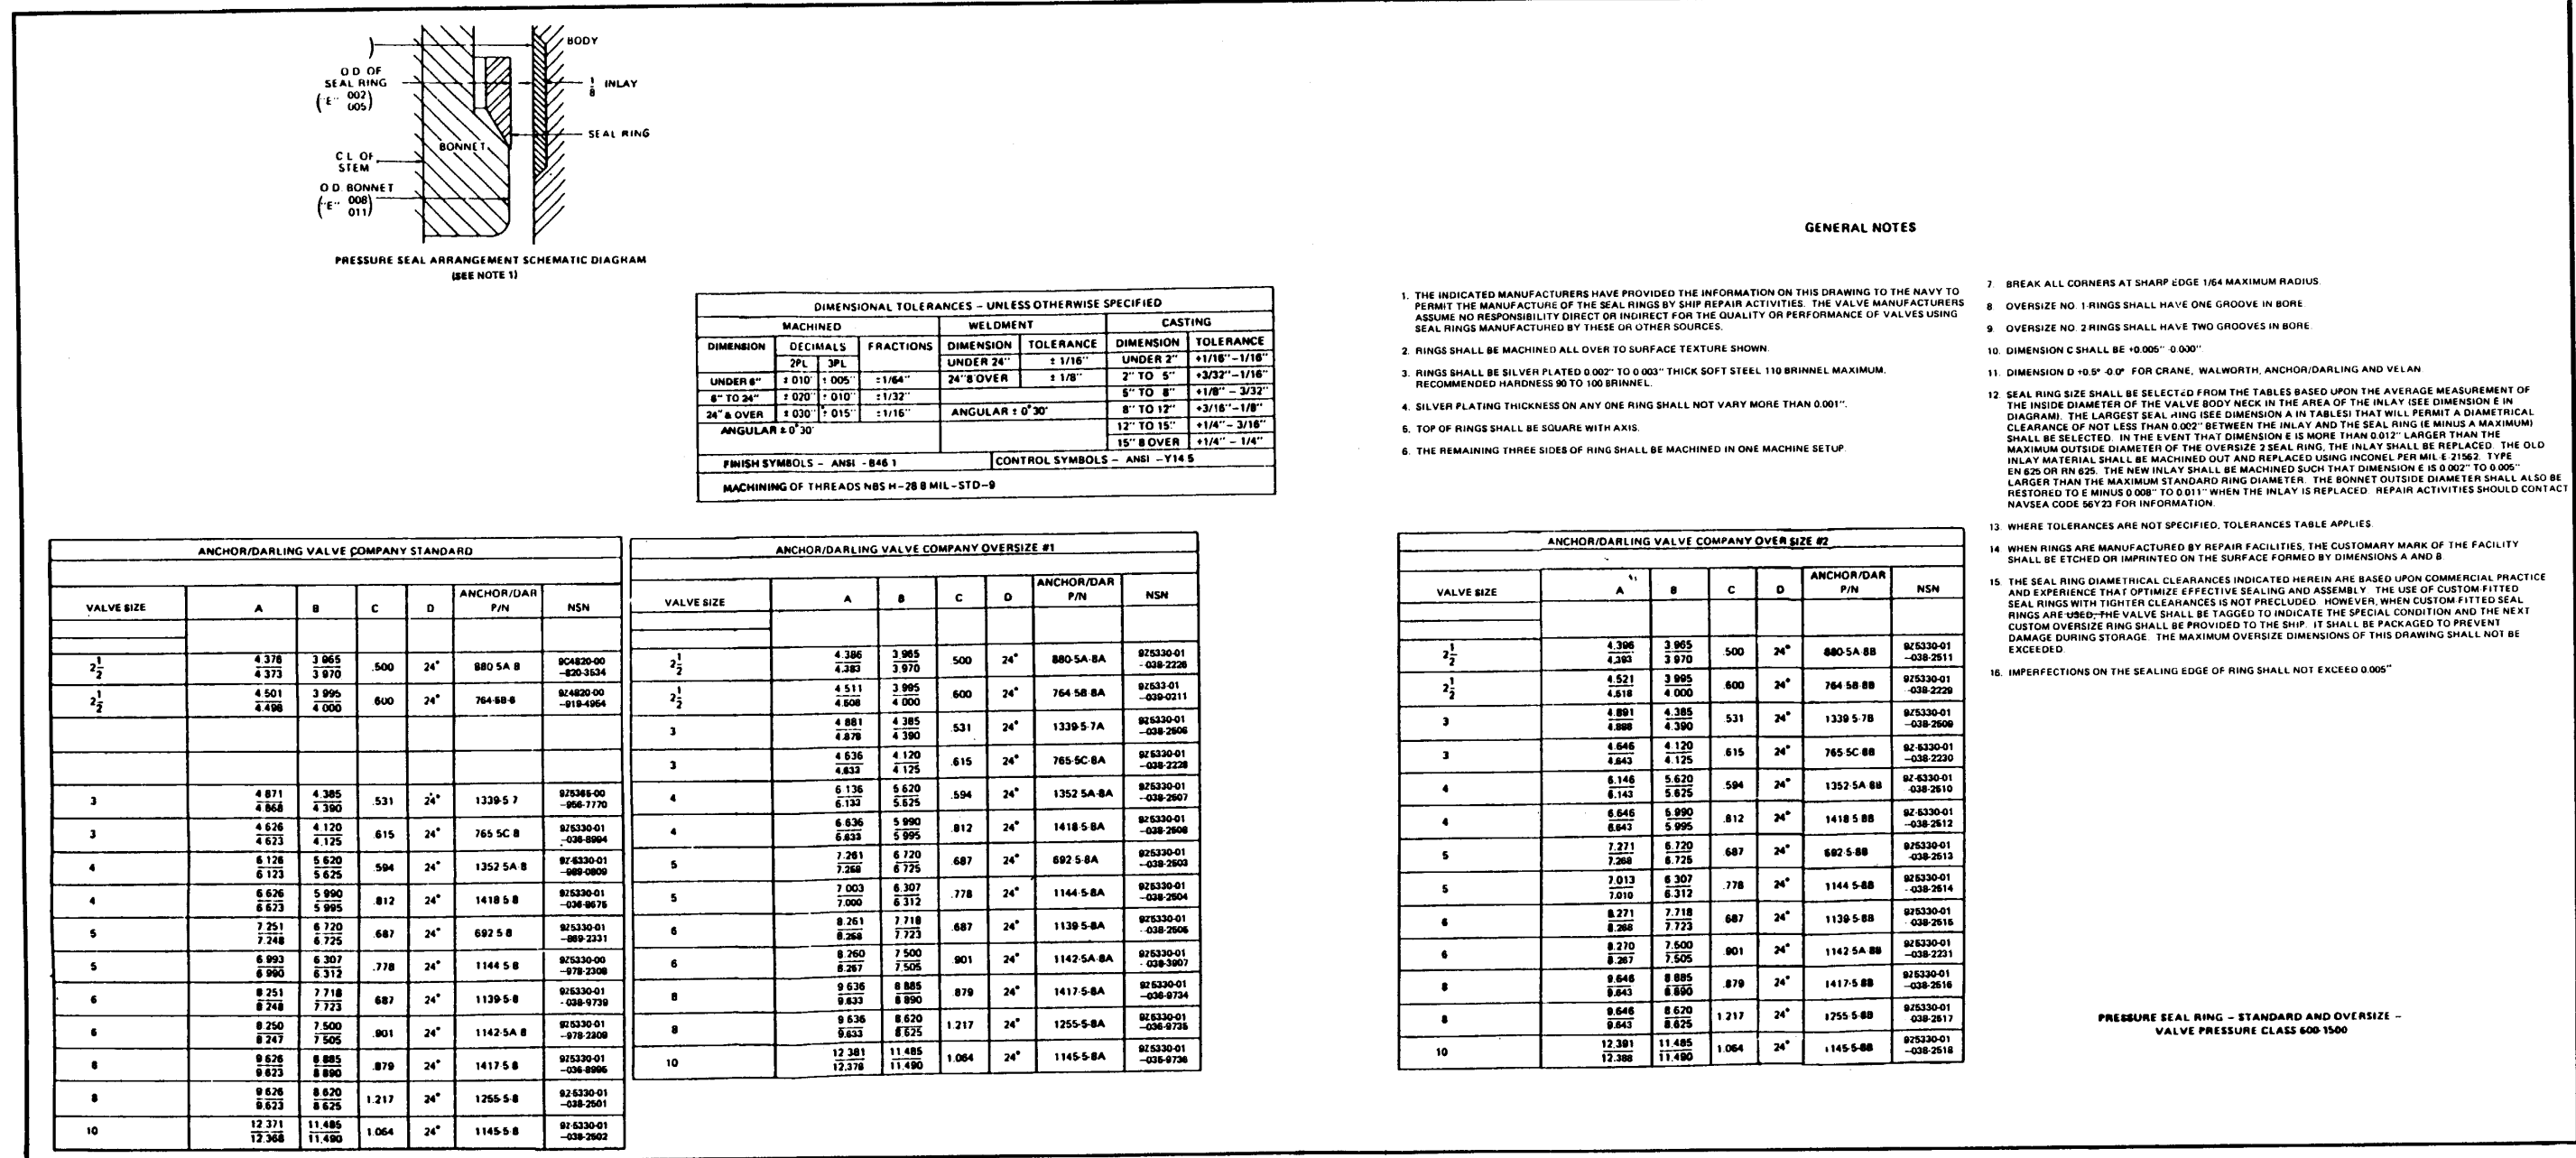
Pressure Seal Ring, Standard and Oversize (Sheet 1 of 3)
